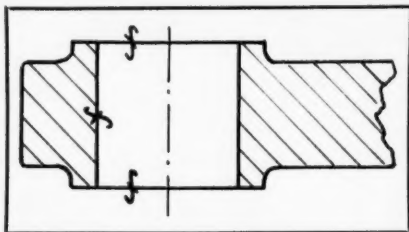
Cross-sectional drawing of part on which three machined surfaces are to be protected during welding and shotblasting or sandblasting prior to finishing.
